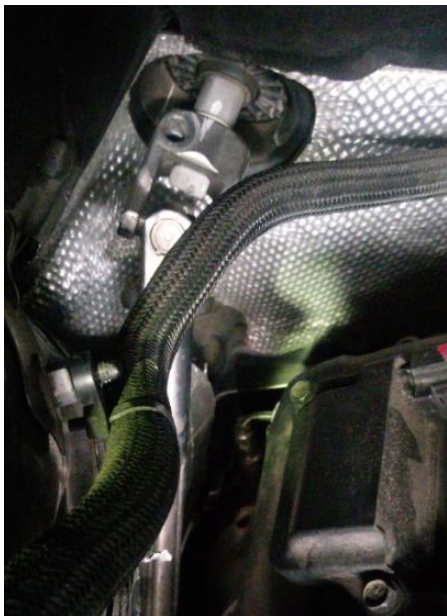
Steering Shaft to Steering Rack Top Unit prior to
